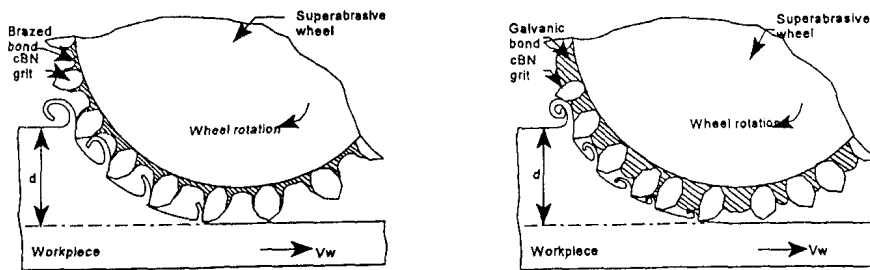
Schematic comparison of brazed type and galvanically bonded single layer cBN grinding wheel
